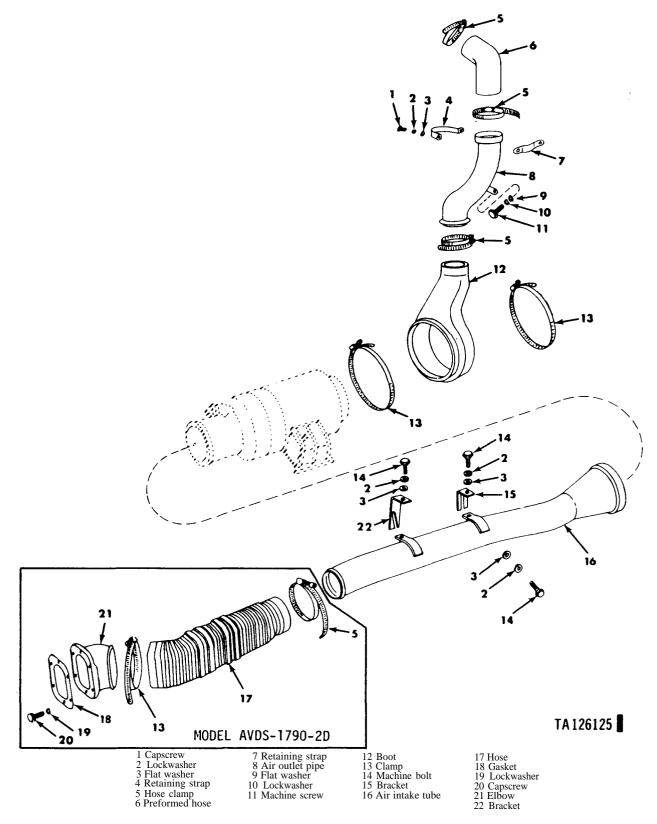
Generator air ducting and associated partsexploded view, Model AVDS-1790-2D and AVDS-1790-2DR engines.
